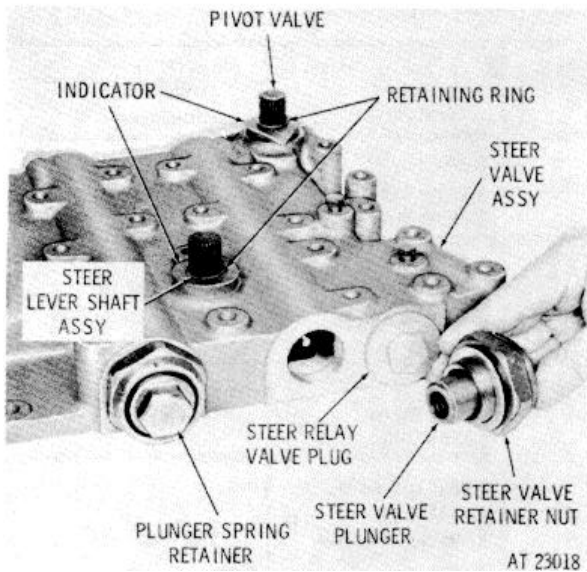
Removing (or installing) steer valve plunger and related parts.
